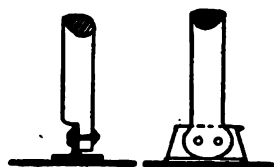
Showing connection of Pillar Feet to Steel Decks, or Inner Plating of Double Bottoms.
